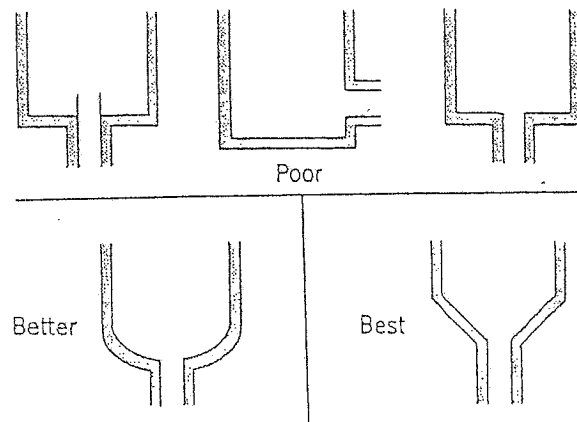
Drainage of corrosive liquids is important in preventing corrosion.
